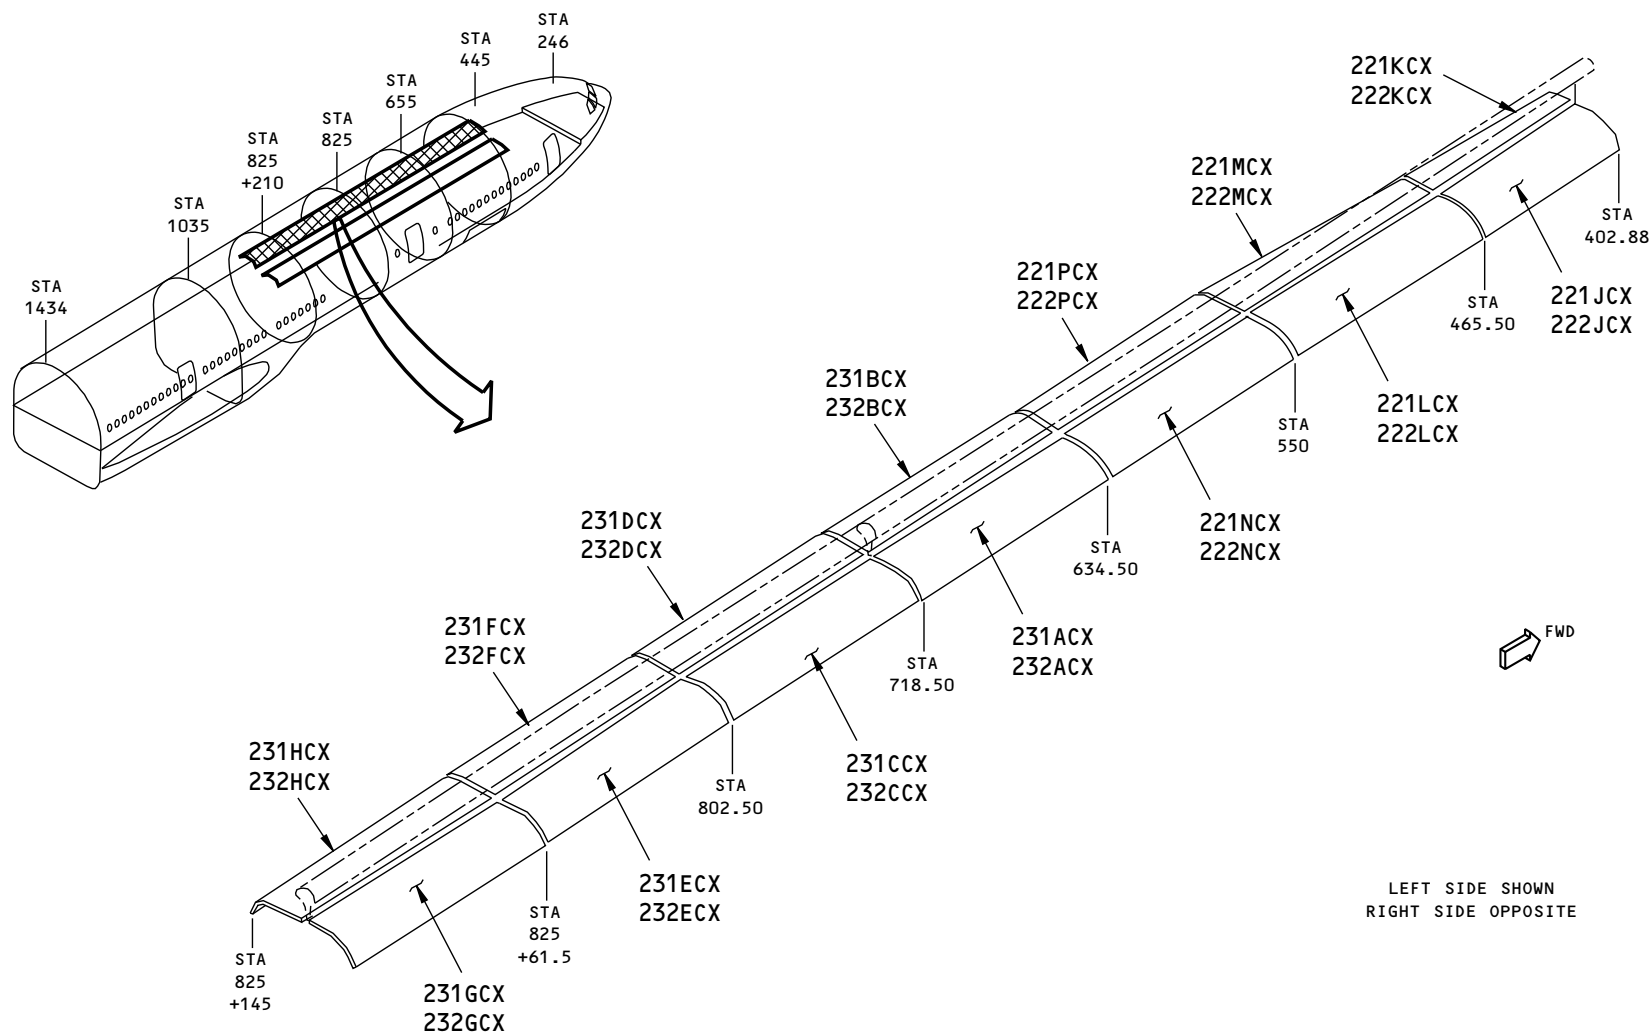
SUB-MAJOR ZONE 221, 222: DOOR NUMBER 1 LOWERED CEILING PANELS (777-300)
